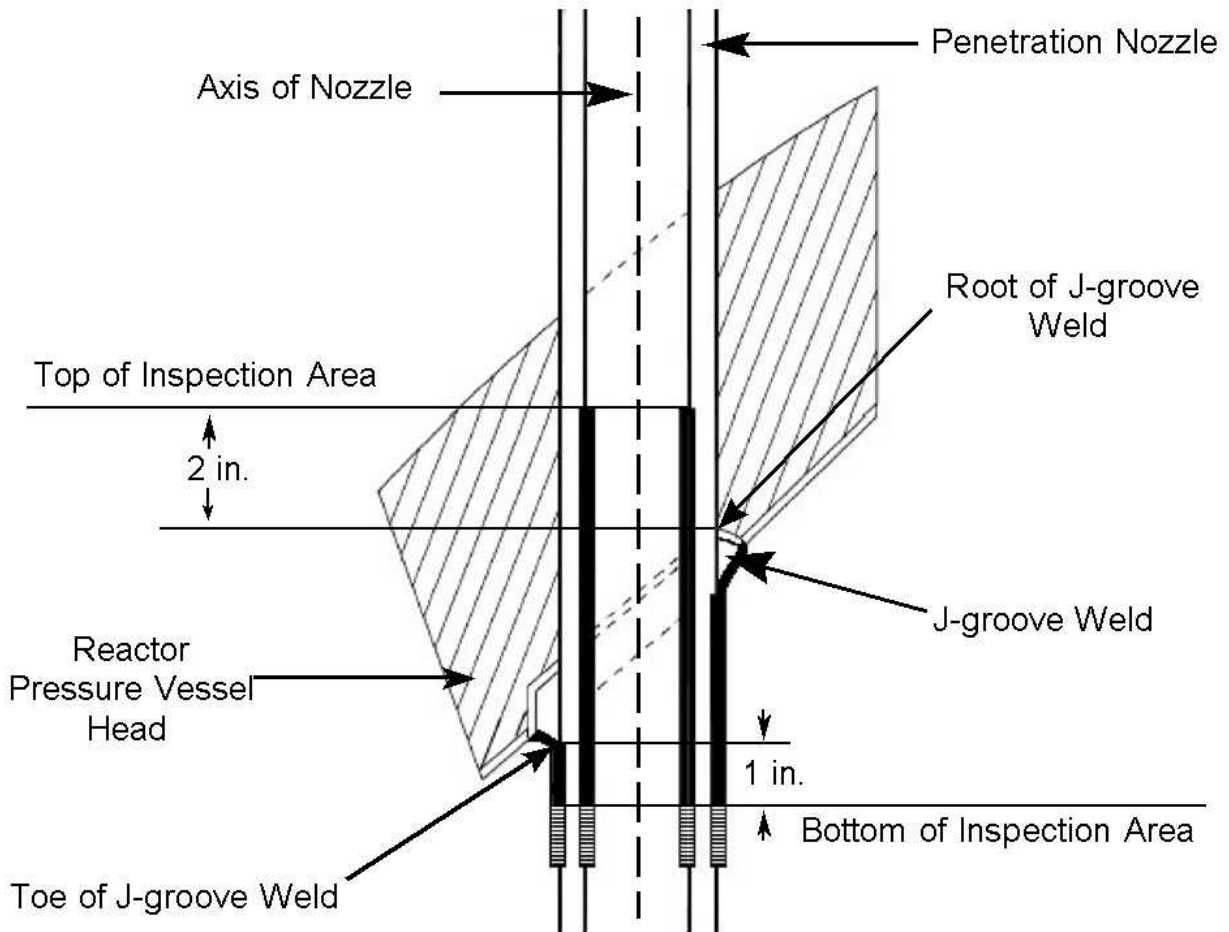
Required Wetted Surface Inspection Area With Stress Analysis (The penetration nozzle and J-groove weld surface areas in black require surface inspection. Nozzle area in grey requires surface inspection only if applied stress is ≥ 20 ksi in that specific area.)
